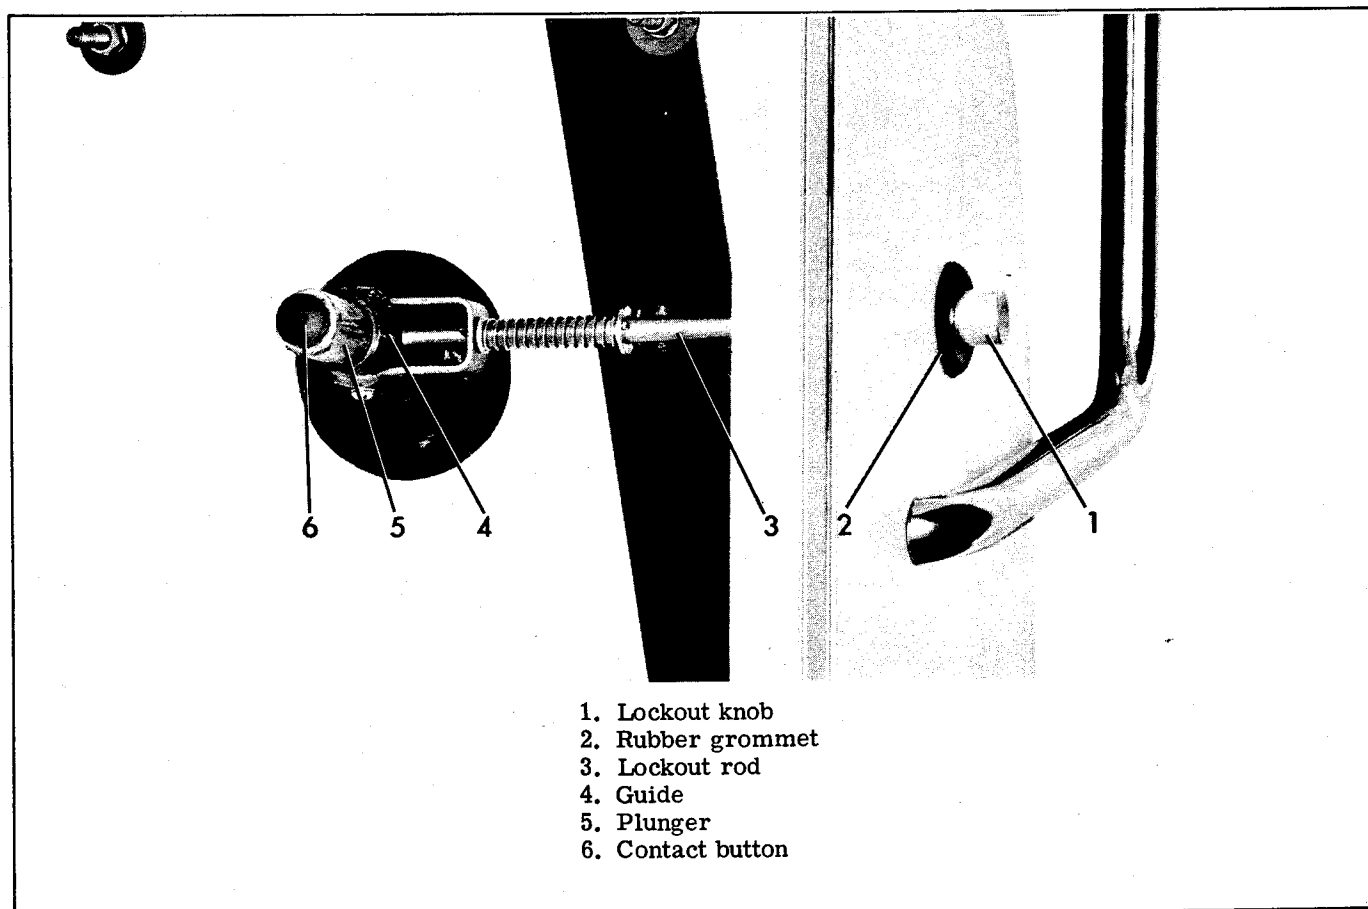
Automatic Seat Brake Lockout Mechanism
